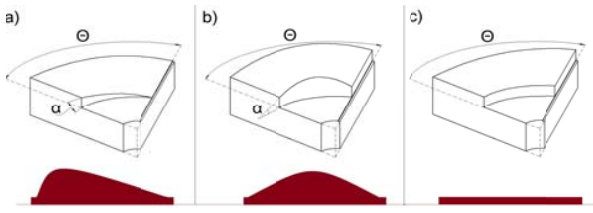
Pad shapes: (a) plane slider pad, (b) curved slider allowing the operation in both directions, (c) flat pad; (Θ – pad angle, α – inclination angle of the surface)
